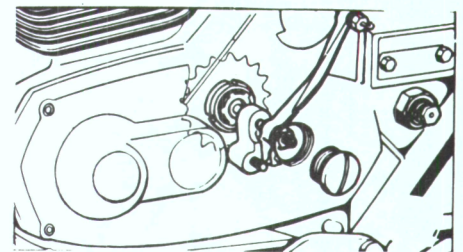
Clutch adjusting screw is located behind plug in left side cover.
